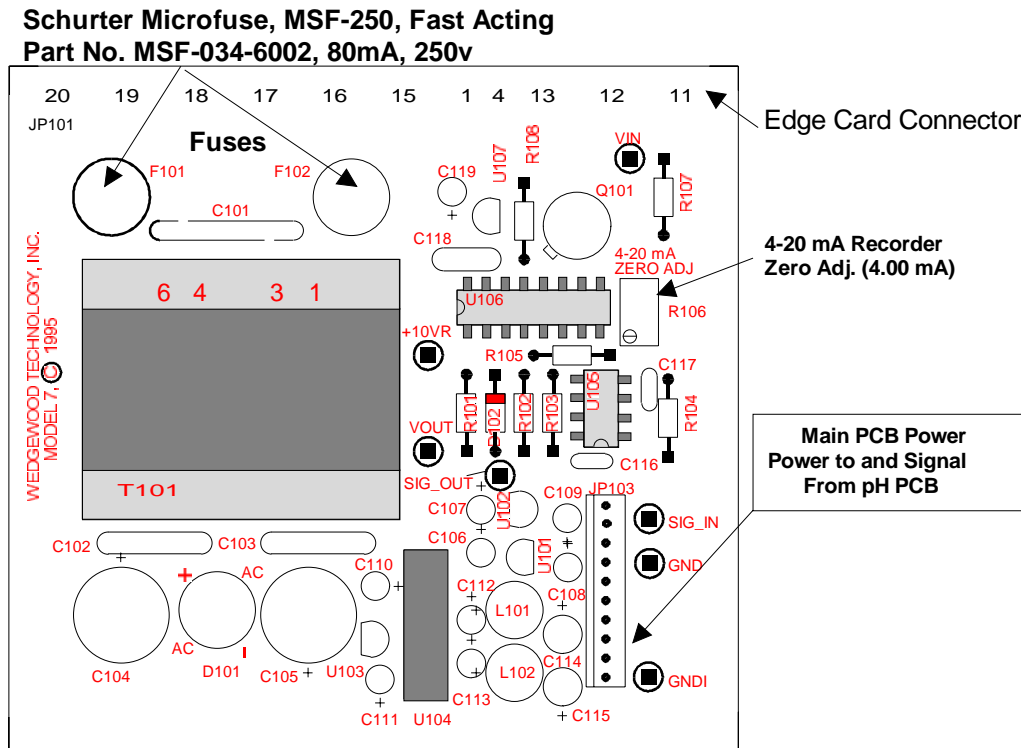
Power Supply and Recorder Output PCB and Fuse Location
